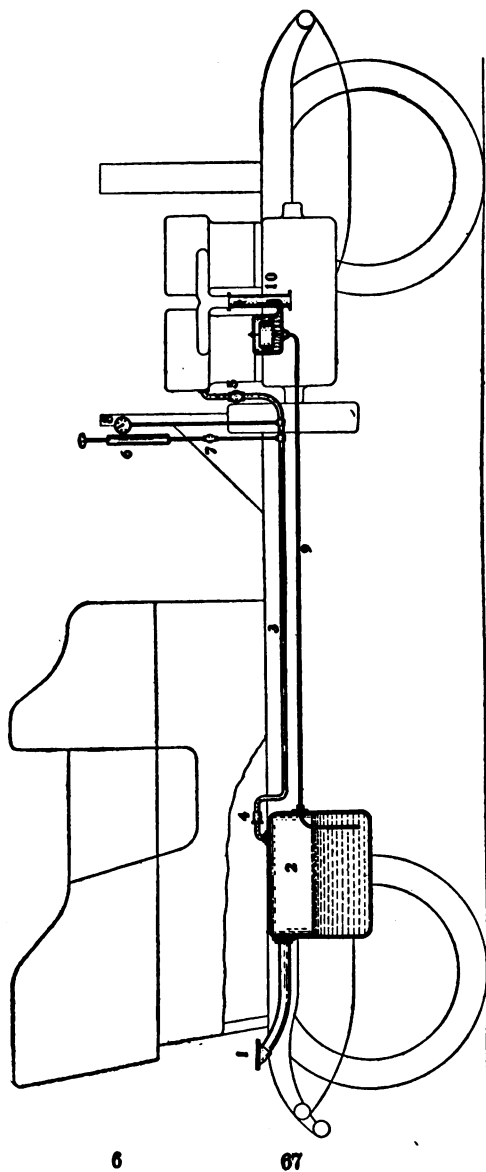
PRESSURE FEED GASOLINE SYSTEM. 1, Filling cap; 2, tank; 3, pressure pipe; 4 and 5, check and relief valves; 6, hand pump; 7, check valve; 8, pressure gauge; 9, feed pipe; 10, carburetor.
